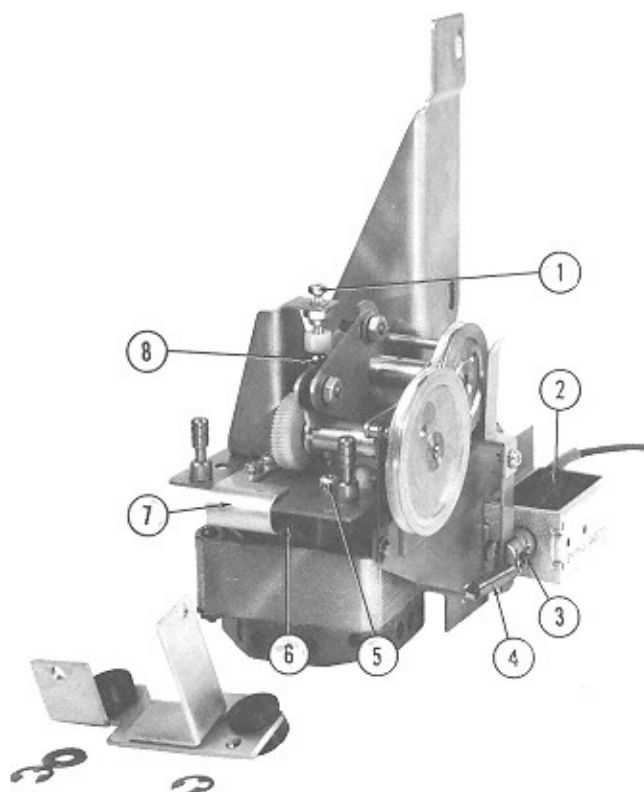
TURNTABLE MOTOR ADJUSTMENT
